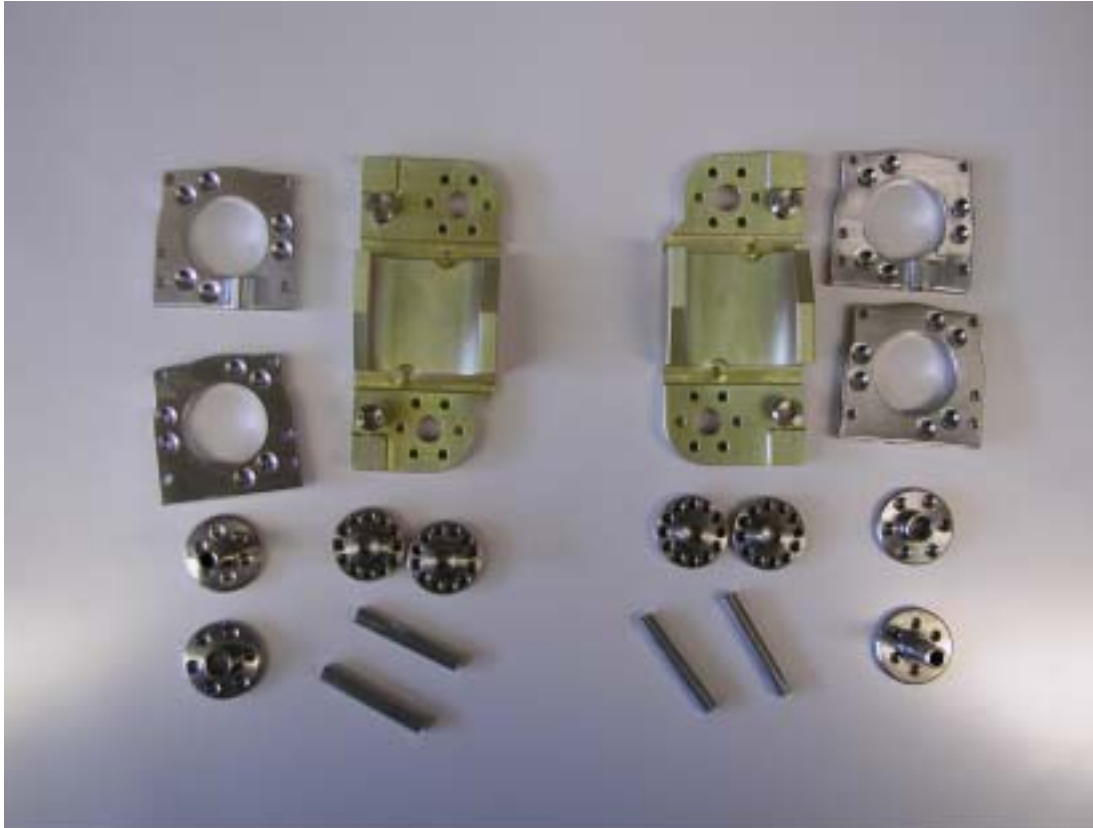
Components required for photometer support assembly (fixed capstans already fitted)
